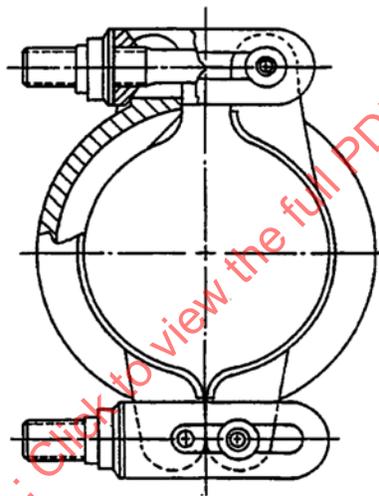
INCORRECT INSTALLATION DOUBLE LATCH COUPLING /12c/
